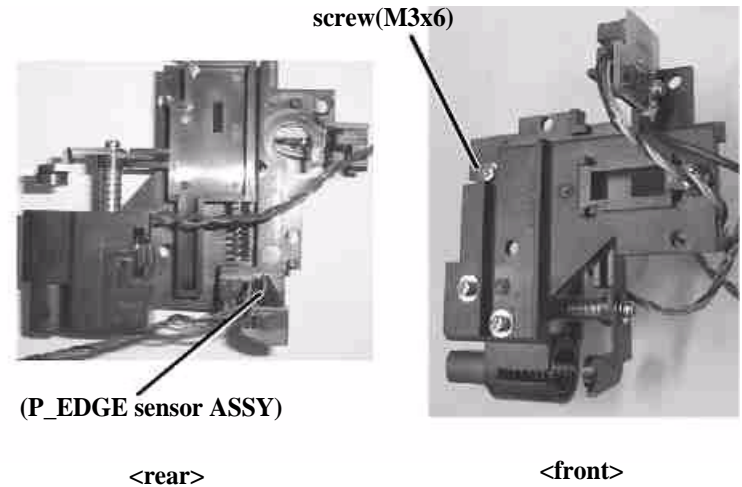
Removing the P\_EDGE Sensor Assembly
